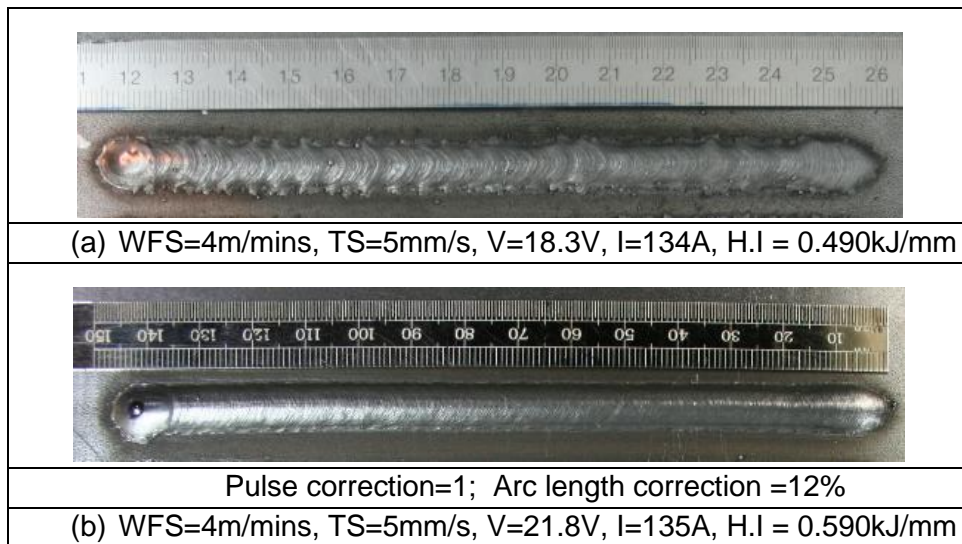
Examples of weld bead appearance produced using single-wire GMAW, with (a) without the use of arc and pulse correction (b) with use of arc and pulse correction
